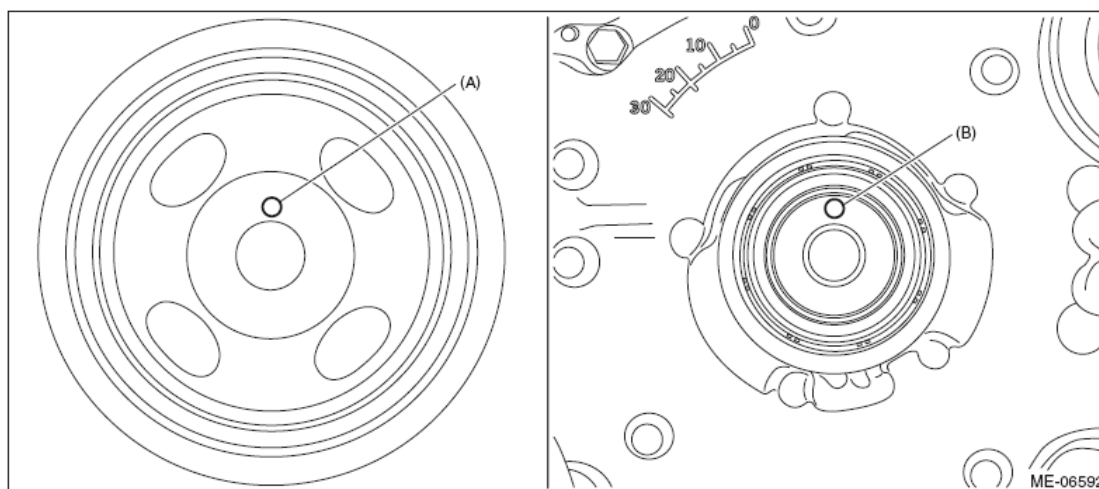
Identifying Crank Pulley Knock Hole And Boss Knock Pin
